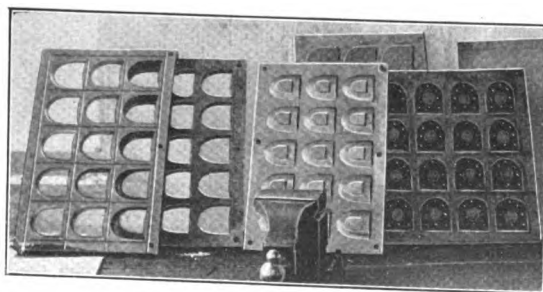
MOLDS FOR MAKING RUBBER HEELS
